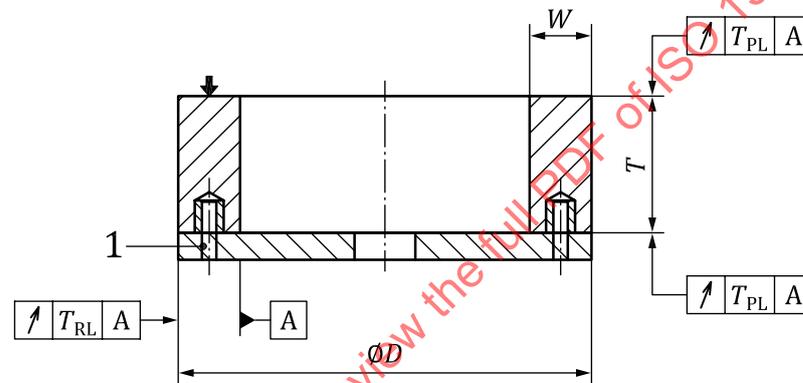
Disc grinding wheel, cemented or clamped to a back-plate (Type 35)
